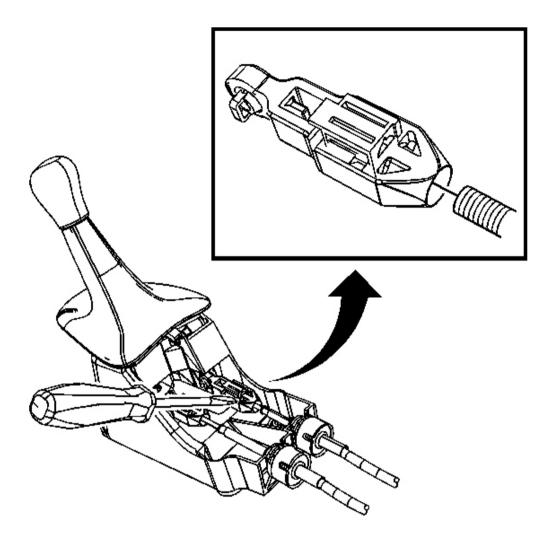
Shift Cables & Control Lever Assembly Housing Courtesy of GENERAL MOTORS CORP.
